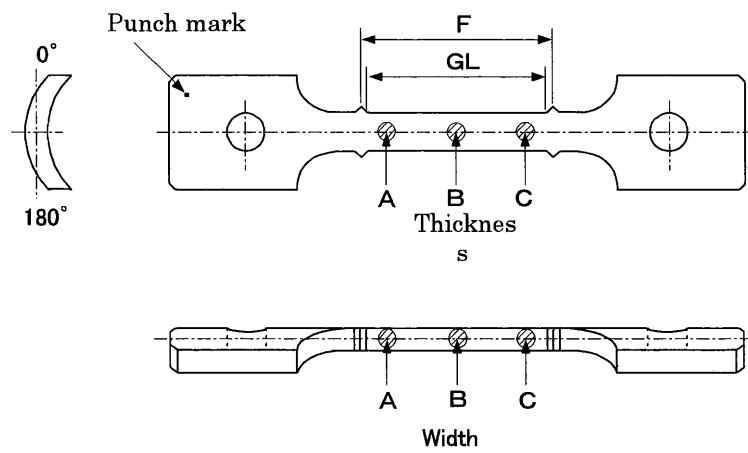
Size measurement part of test piece for tensile test (1/2)
